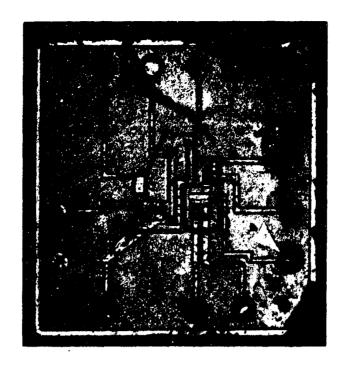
Test module chip, following removal from printed circuit board, also having electrolytic etching of collector pad as shown in magnified view in Figure 14.
